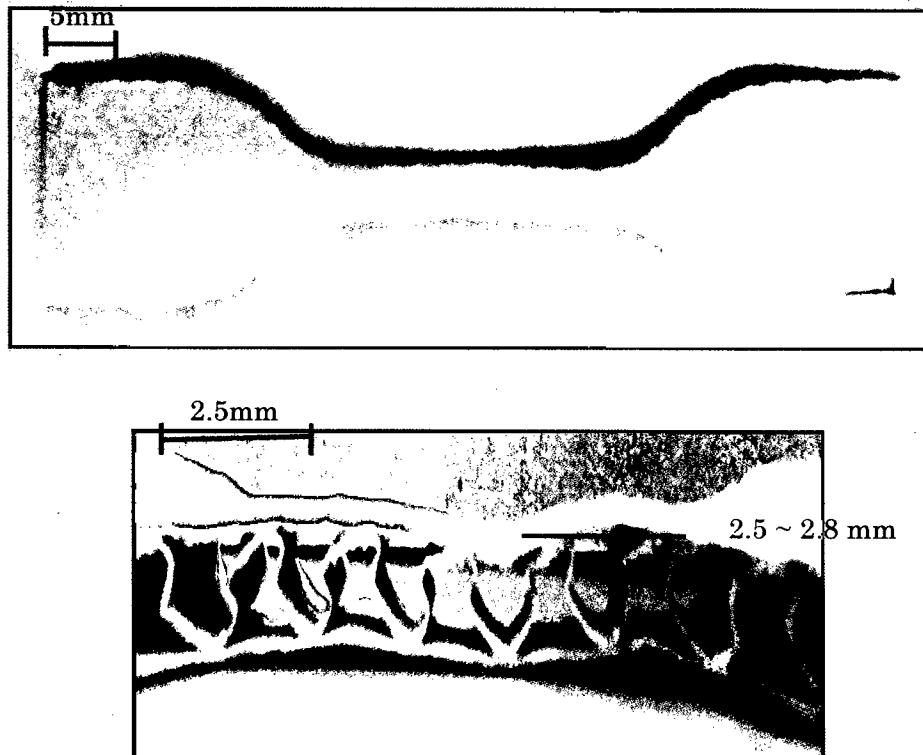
Result after using die cutting and the thickness of corrugated cardboard after deformed.
